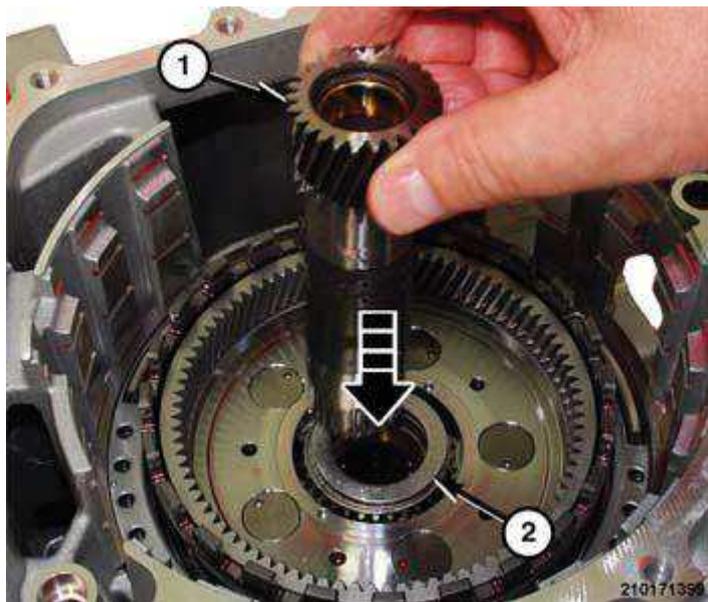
Middle Sun Gear & Planetary Gear Hub
